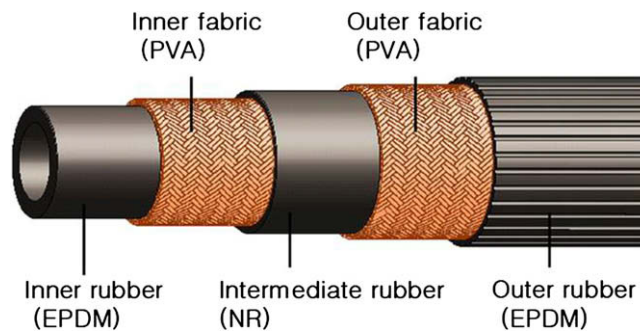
Structure of rubber hose for automotive hydraulic brake.
